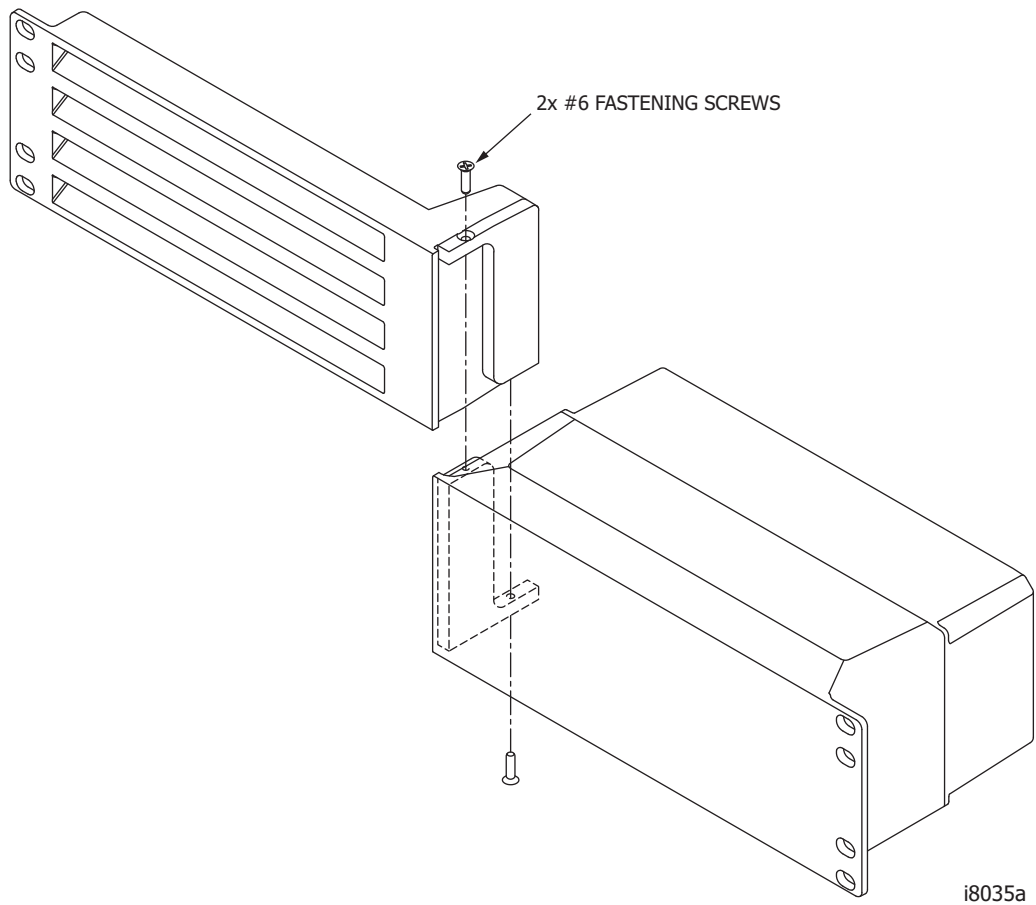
SEL-851 19-Inch Horizontal Rack-Mount Assembly
